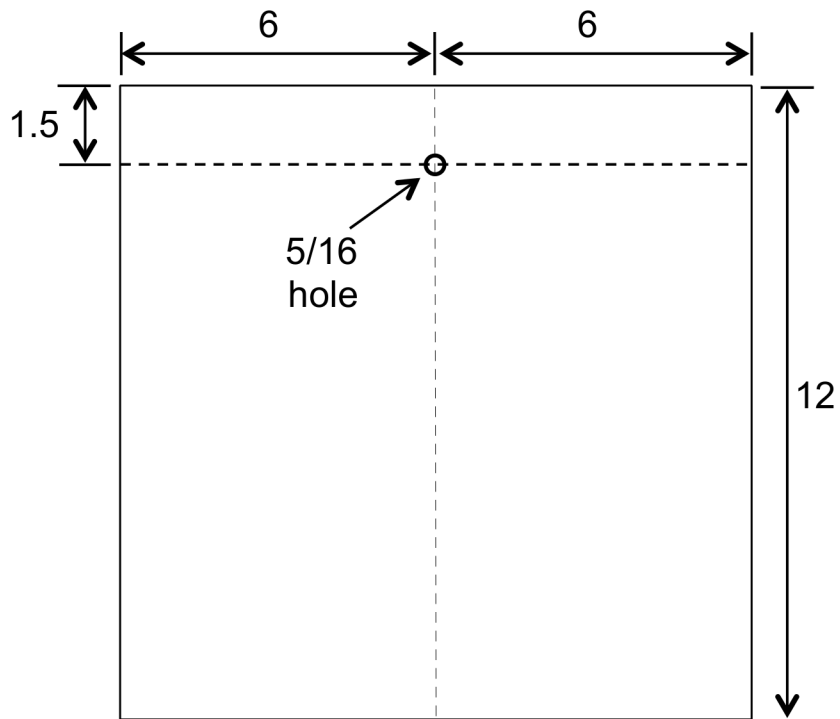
Location of holes in top and bottom plates for mounting to support rod.
